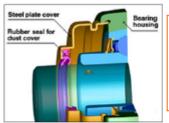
Fig.A Steel plate covered bearing unit Steel plate covered bearing unit
